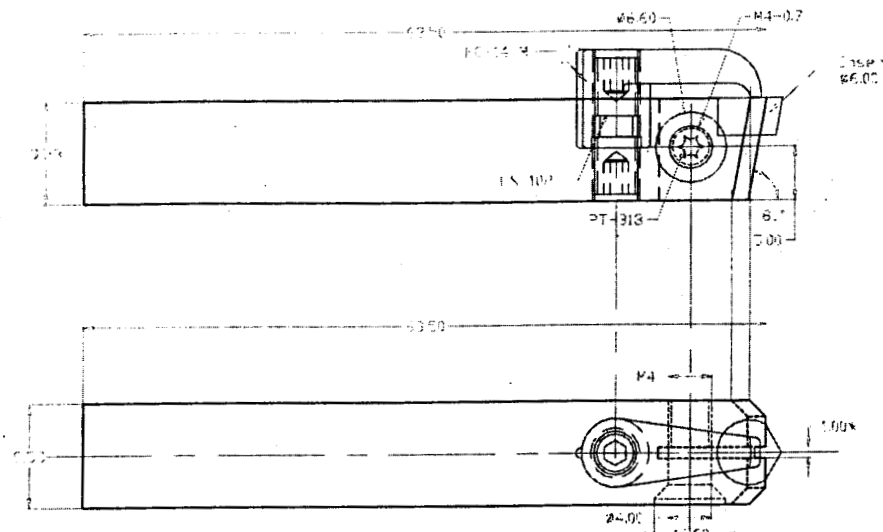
The drawing of diamond cutting tool with round cutter and steel holder
